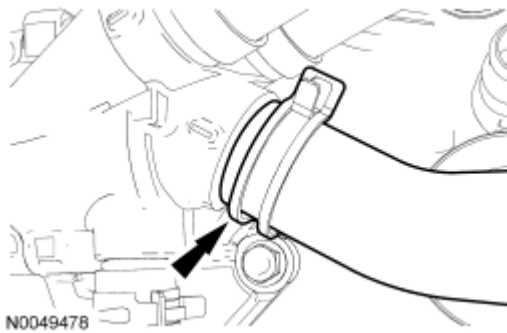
Disconnecting Coolant Hose From Thermostat Housing
